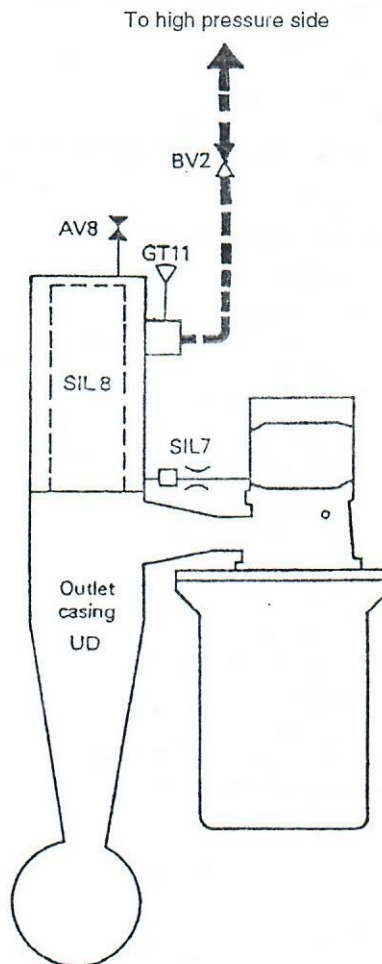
Schematic arrangement for type SVA/SVB/SVK/SVR compressor units fitted with extra equipment for oil separation
